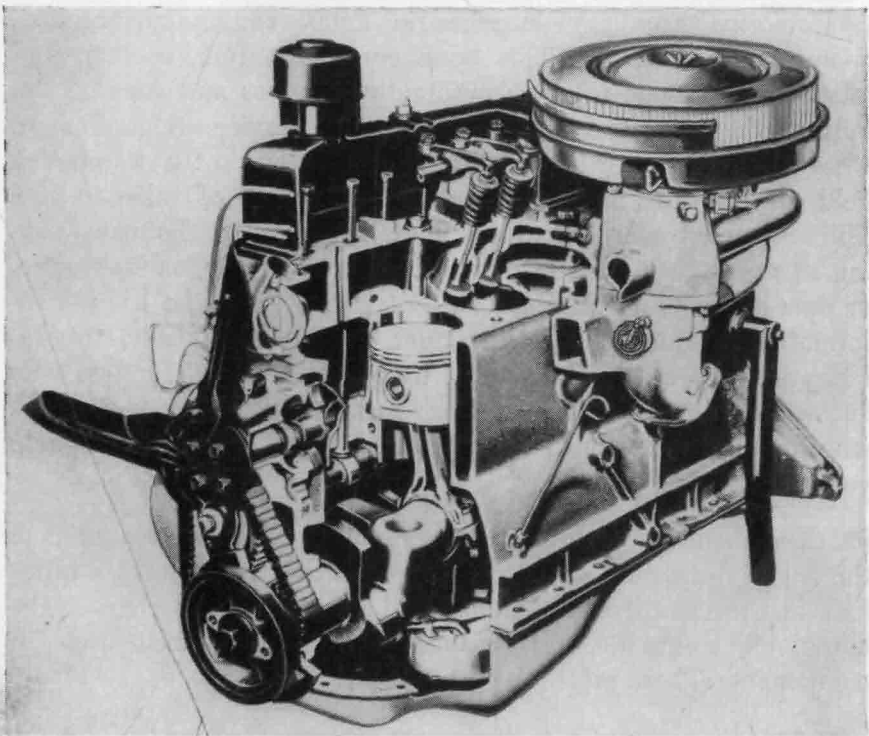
A typical six-cylinder engine partly cut away to show the internal construction. (Ford Division of Ford Motor Company)
